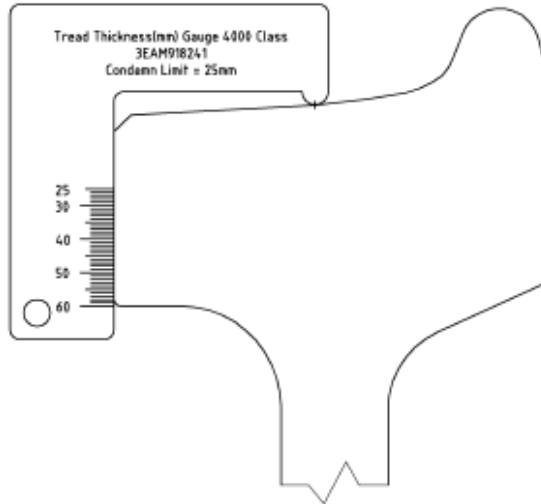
Wheel Condemn Gauge thin rim indication (4000 class only)
